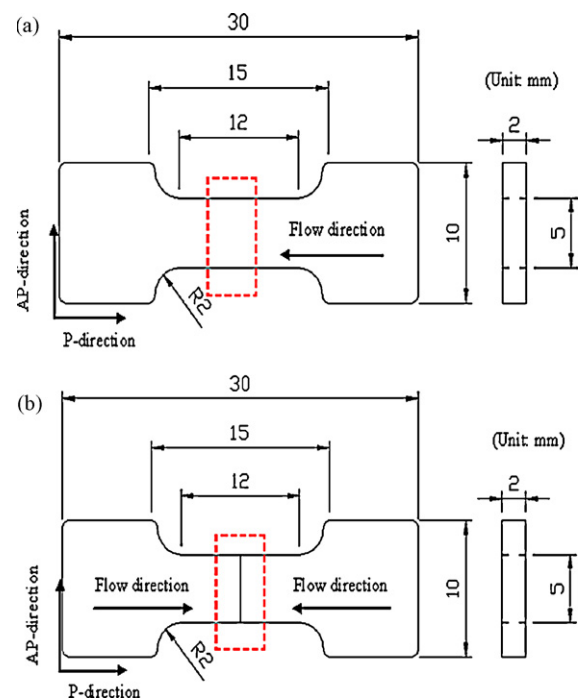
Dimensions of the molded specimens (a) without a weld line and (b) with a weld line.
